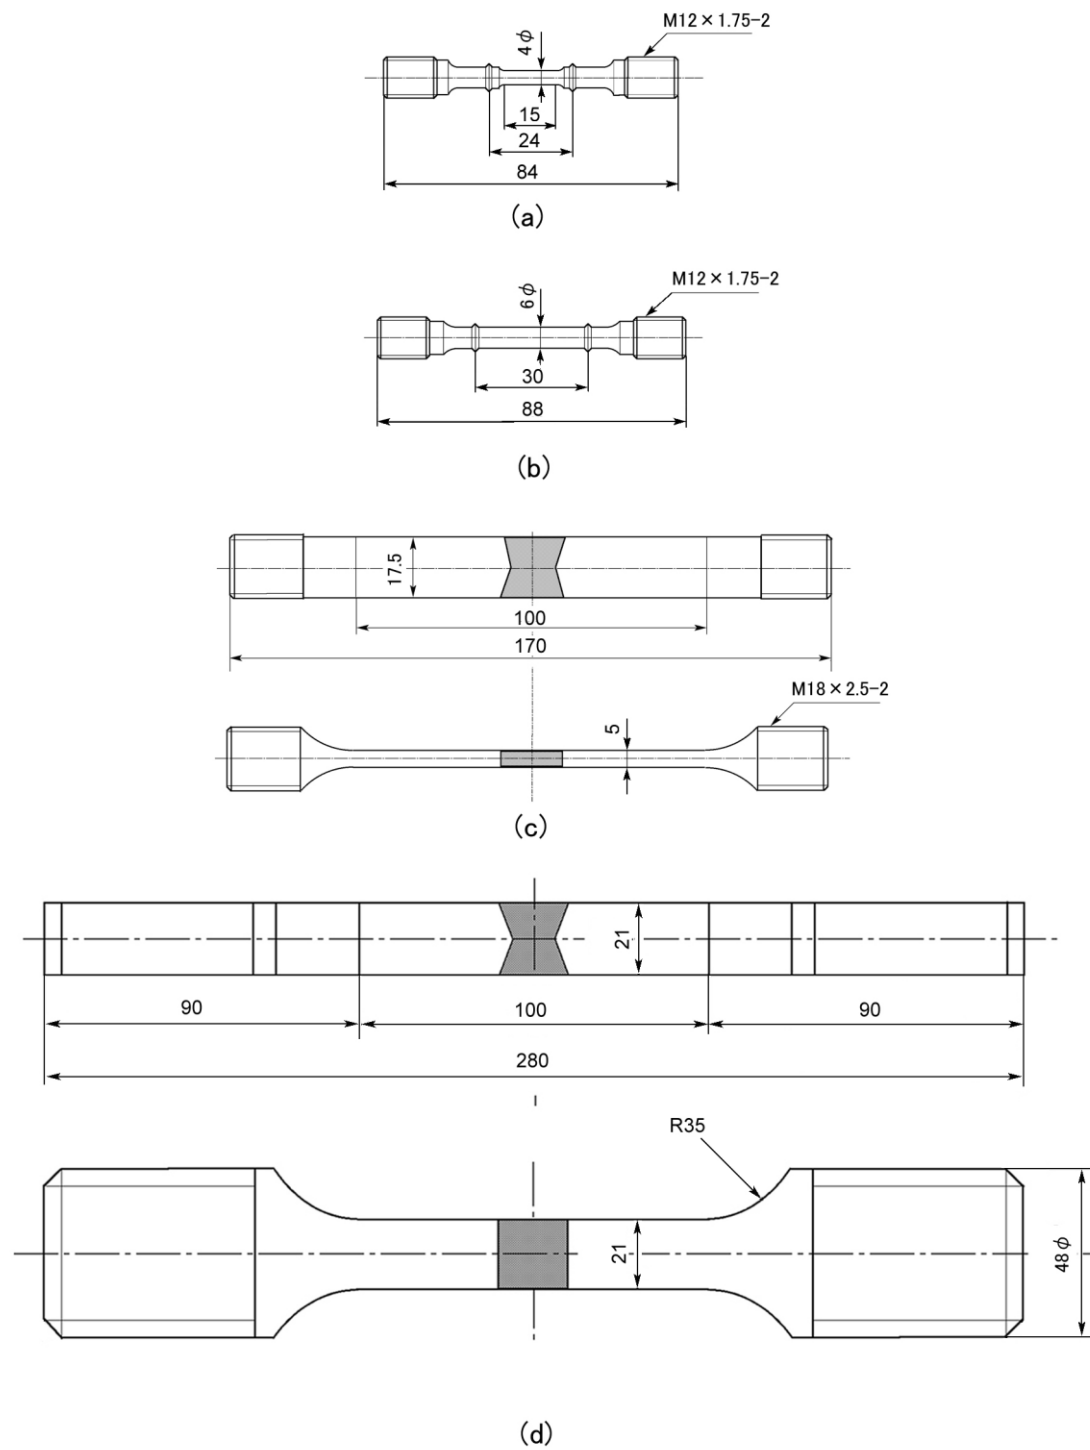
Dimensions of the creep specimens for (a) the simulated HAZ, for (b) base metal, for (c) thin plate welded joint, and for (d) thick plate welded joint. (All dimensions in mm).
